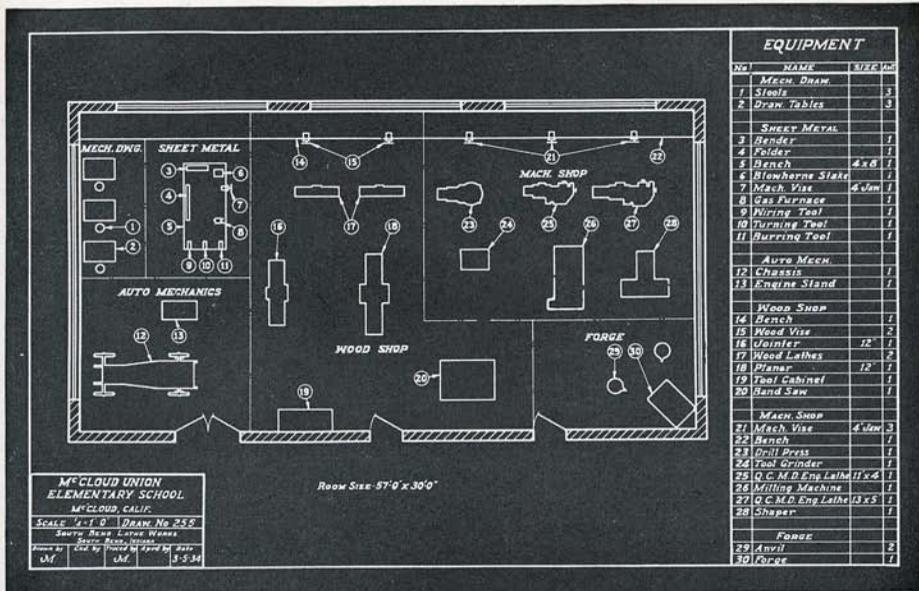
Floor Plan Layout Made for McCloud Elementary School, McCloud, California
